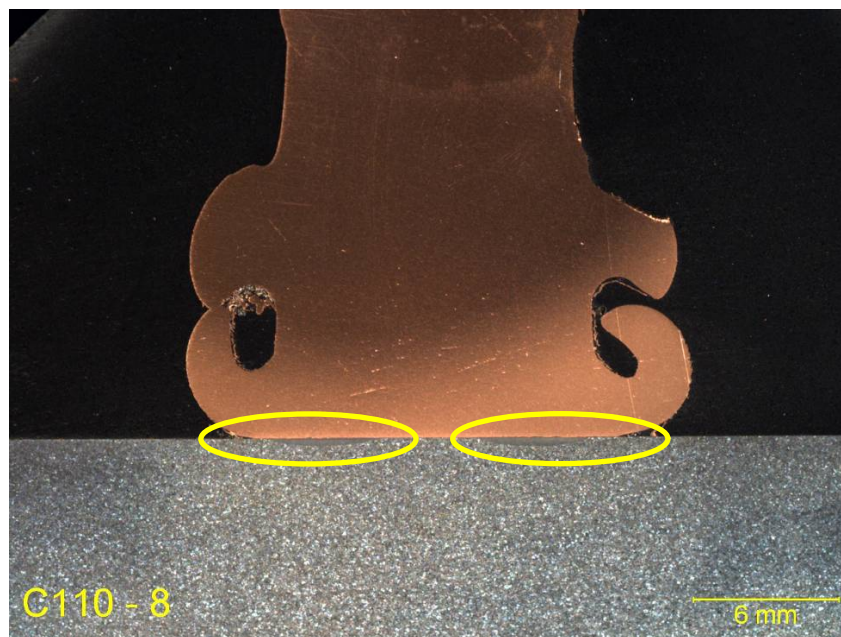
Cross Section of C110 Weld Produced with Inertia Friction Welding
